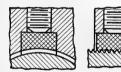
When a longer clamping surface is desired, a slot similar to a keyway is cut into the retaining member.
